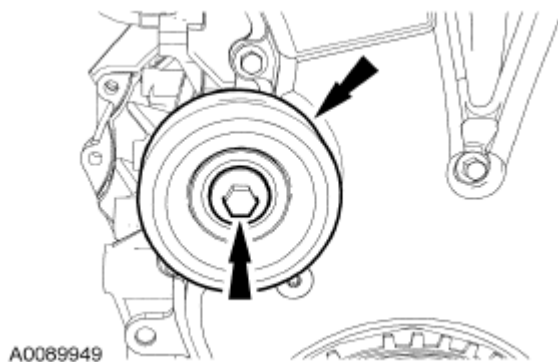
Locating Accessory Drive Belt Idler Pulley (2 Of 2)
